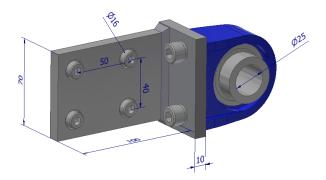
Structure that holds the belt arm with dimensions in mm.
